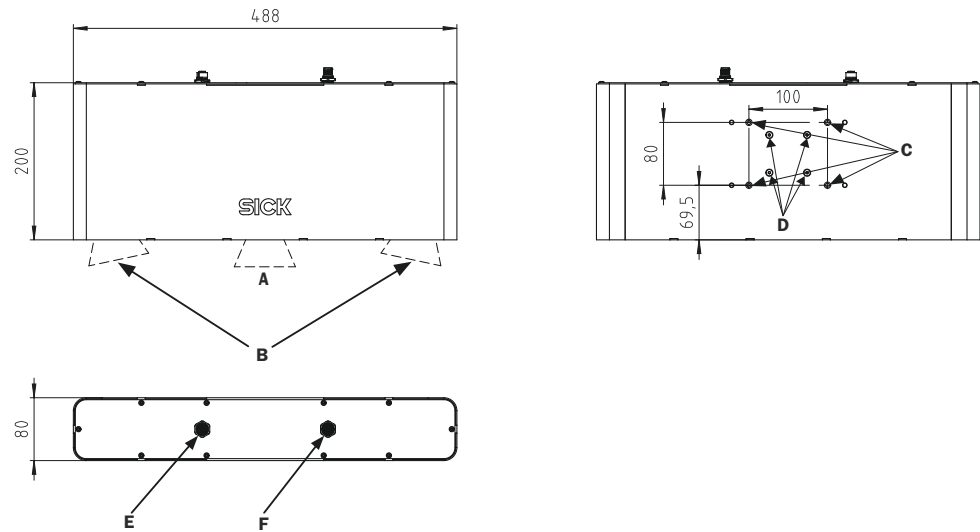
Ensensio X36 camera dimensional drawing (not true-to-scale)
